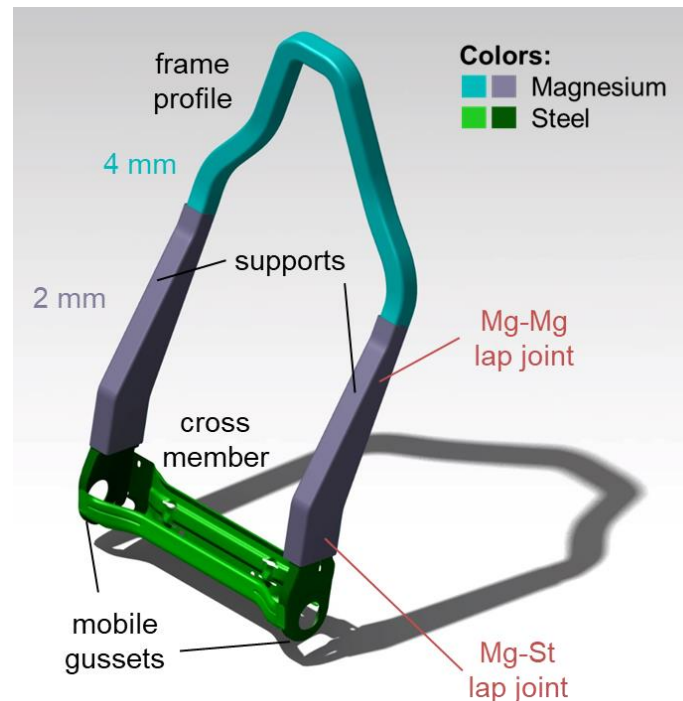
Primary FUMAS concept for the seat backrest structure based on friction stir welding of a magnesium and a steel assembly.
